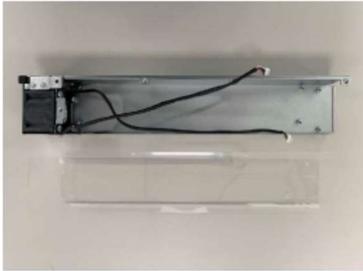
Use tool#1 to unscrew four screws to loosen fan from bottom chassis
